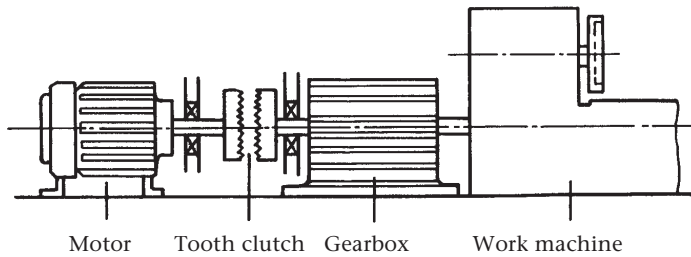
Drive layout incorporating tooth clutch (Load by M_{KM})
